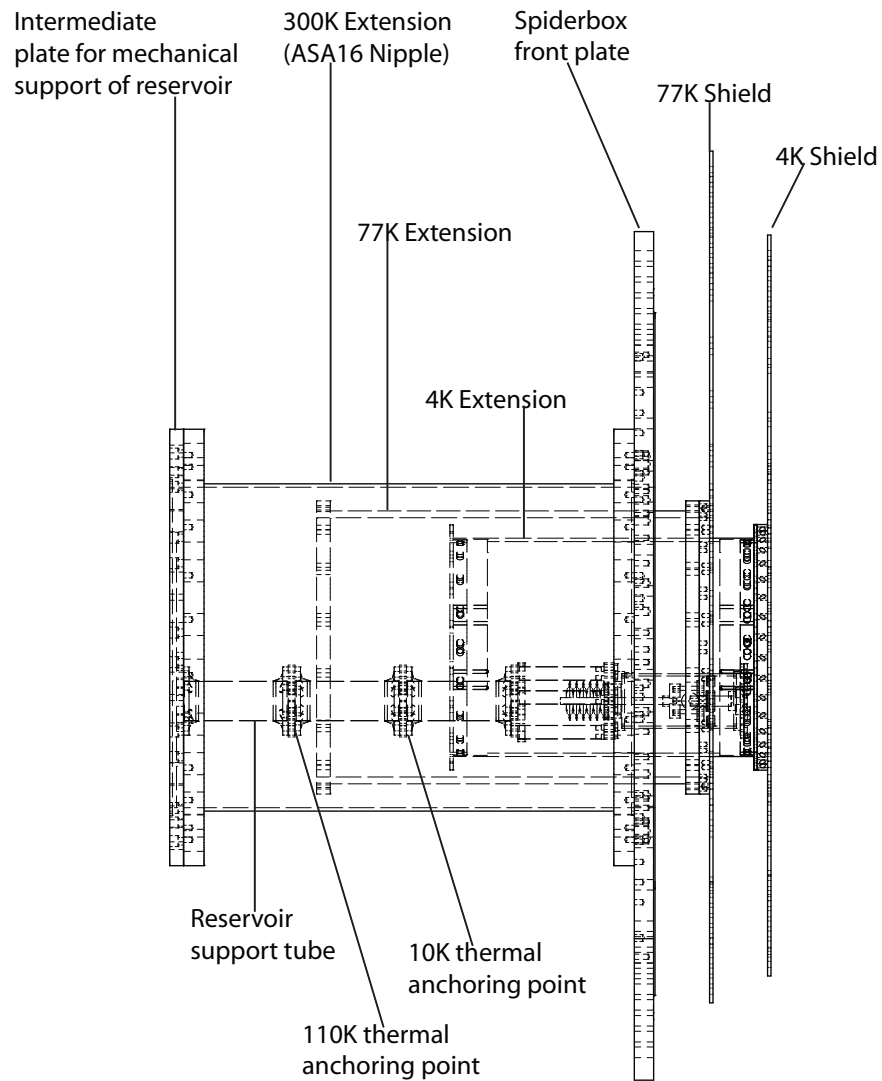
View of the cryogenic shield assembly, modified to incorporate pulsed buffer gas reservoir.
